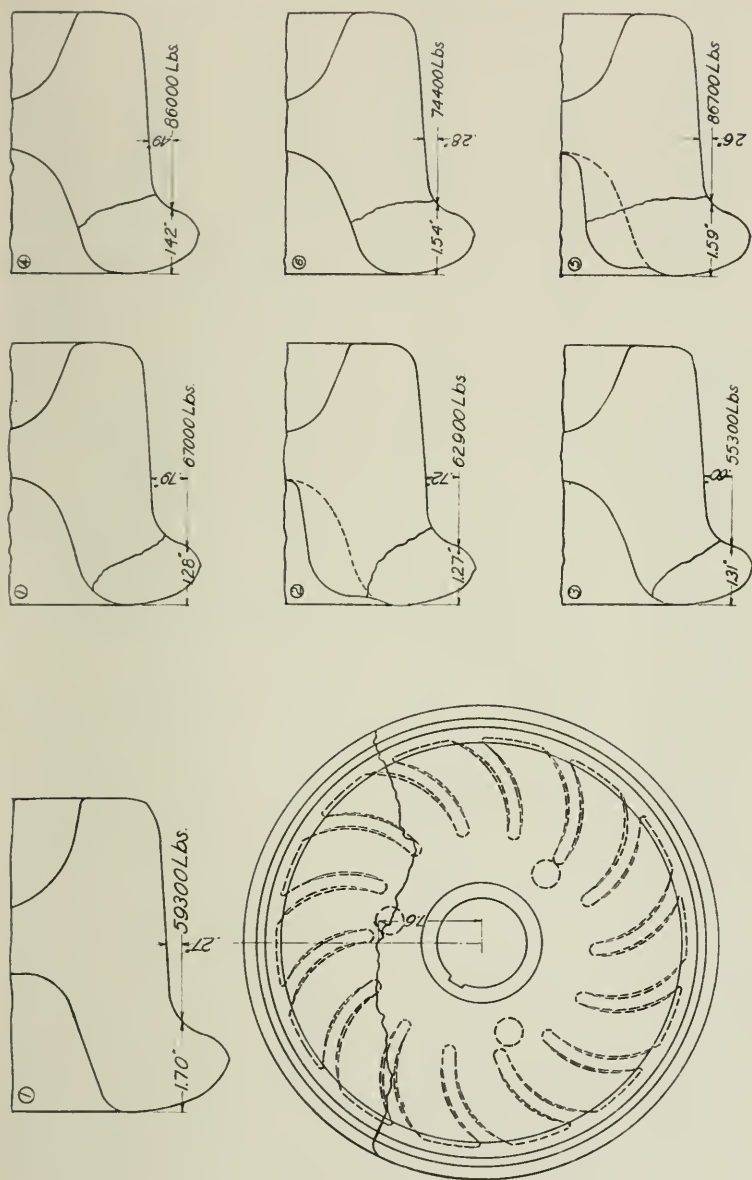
675-LB. M. C. B. WHEEL No. 632 679.
